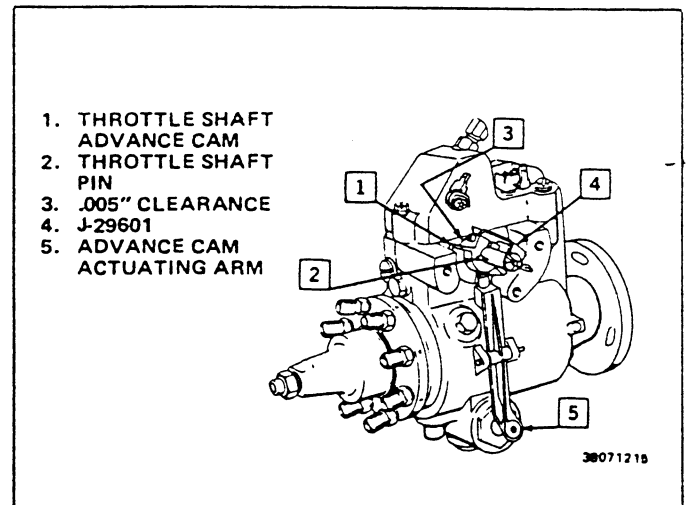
C5-33 Injection Pump Tool J-29601 Installed
